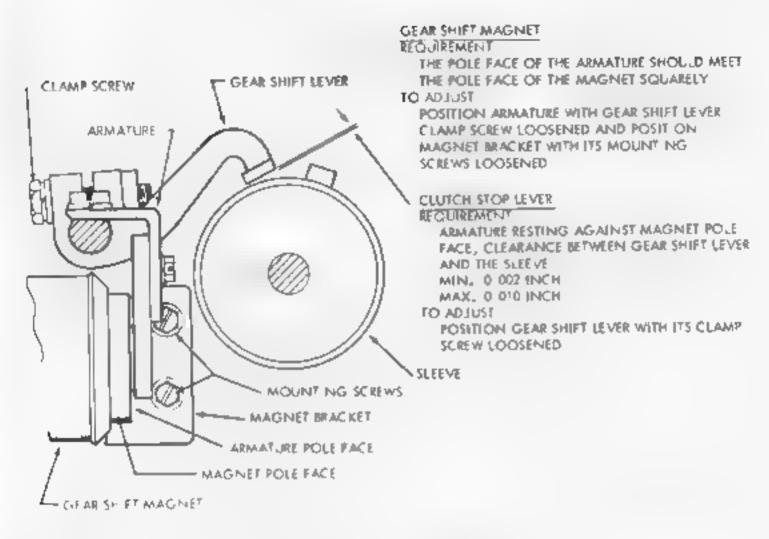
REMOTE CONTROL GEAR SHIFT MECHANISM
